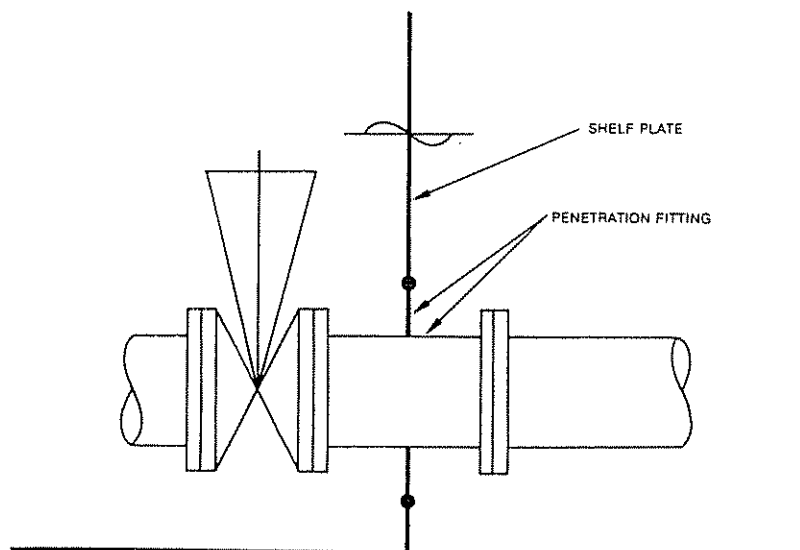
Shelf plates facilitate pipe penetration installation.
